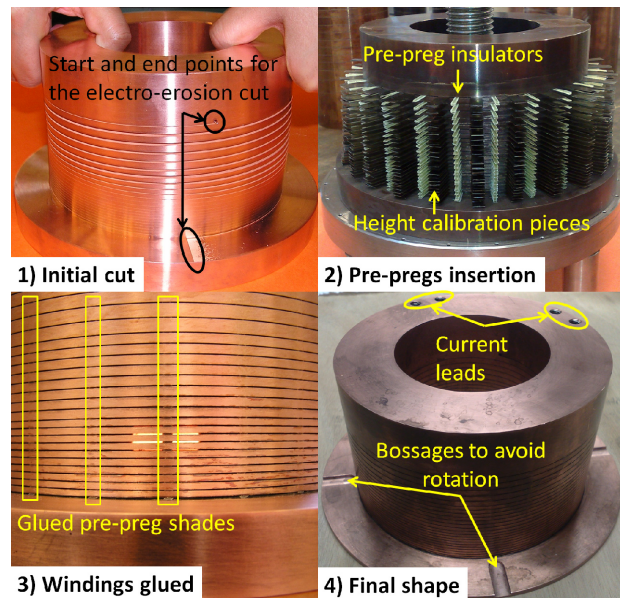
Inner injection helix H1 fabrication process from initial electro-erosion machining (1), through pre-preg insulators gluing (2, 3), to final adjustments in height and shape (4).
